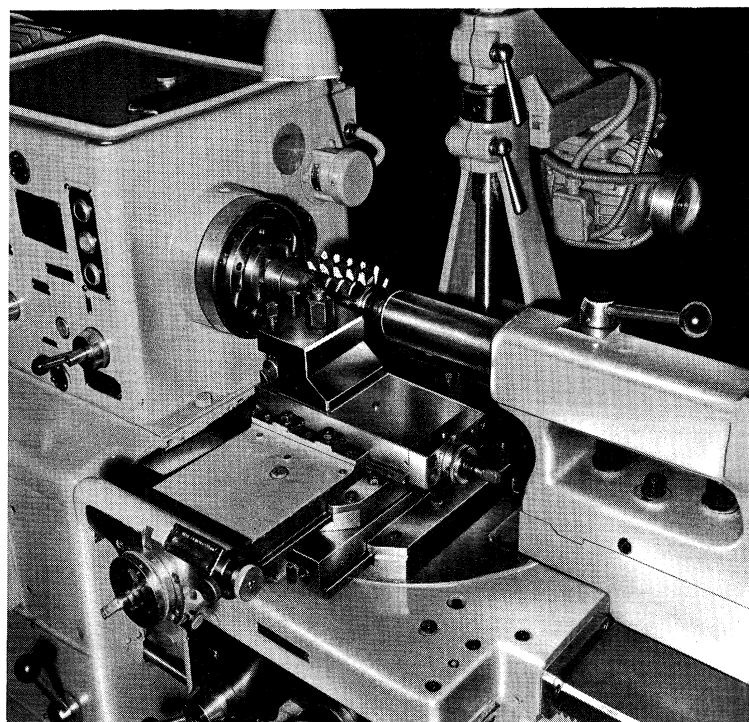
Kuibyshev Automatic Relieving Lathe. Permits 9.5 in. workpiece diameter, 5 hp spindle drive; attachment on saddle slide is for grinding form relief.
